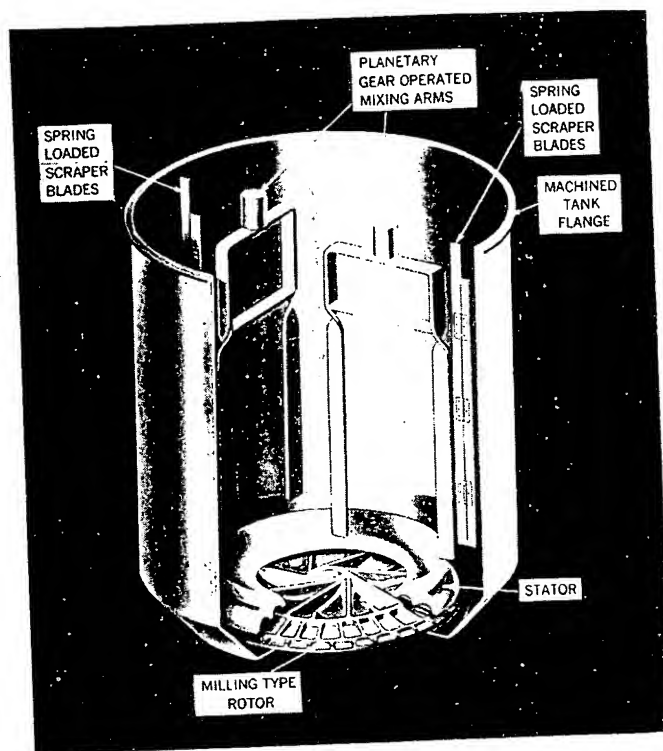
Standard paste-type dispersall mixer with "cupped-rotor" milling element and double-rotating mixing arm circulating element (courtesy, Abbe Engineering).
